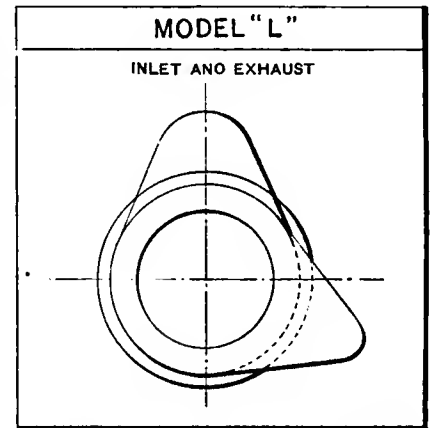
Maxwell camshaft for inlet and exhaust valves combined, showing contour.
